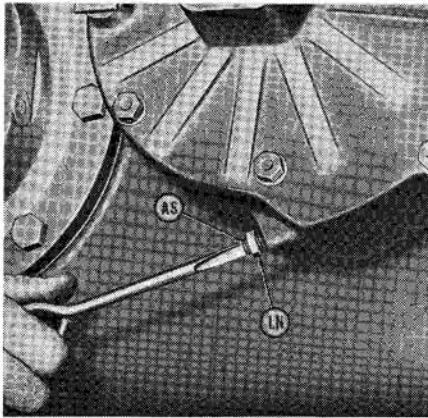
Adjusting model "FSM" and "New FSM" brakes. Refer to text and also to Fig. 165.
